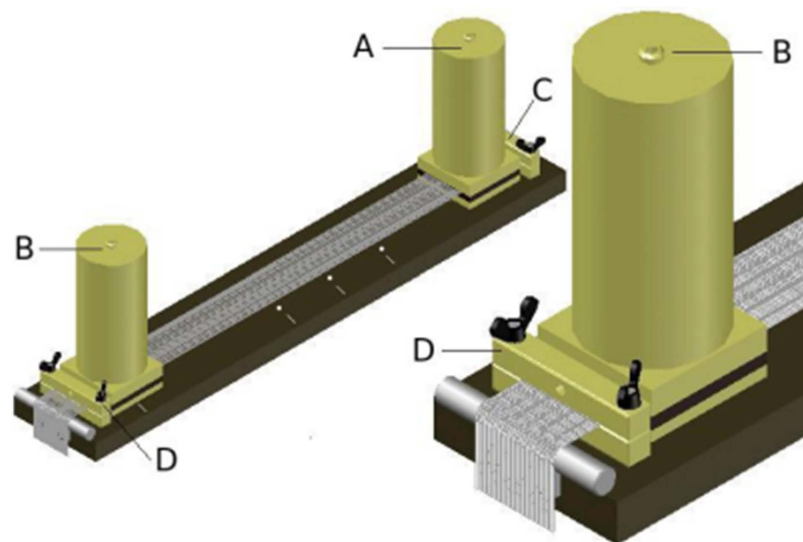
3D model of a test fixture used for the measurement of fabric resistance.
